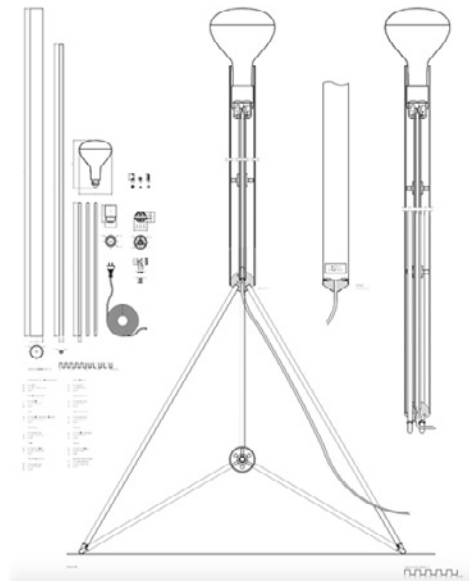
Achille e Pier Giacomo Castiglioni, Luminator, 1954 (drawings by the authors).
